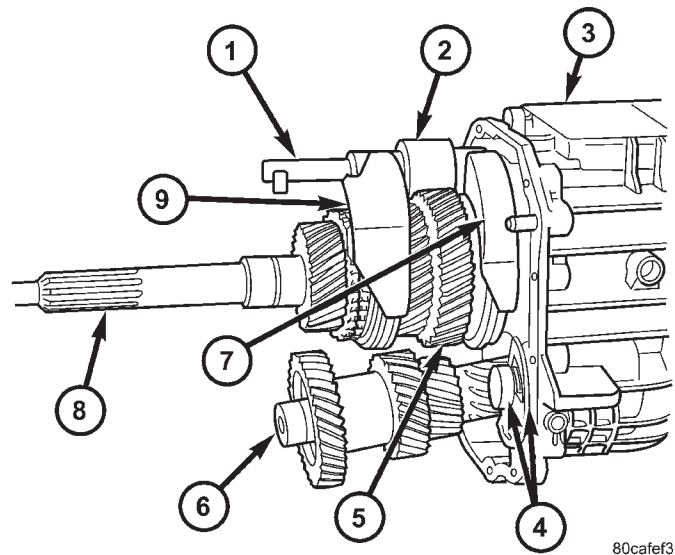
GEARTRAIN AND SHIFT COMPONENTS
